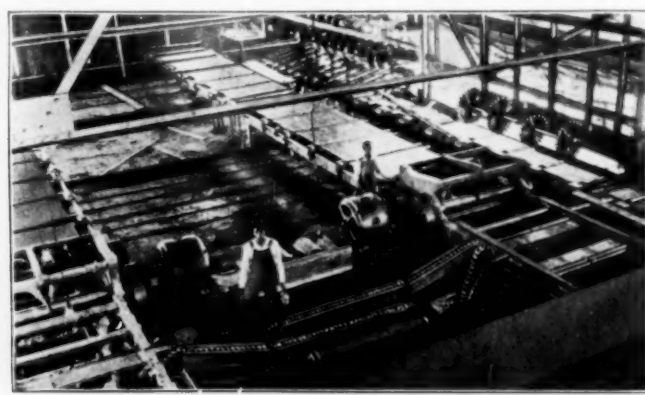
INTERIOR OF SAWMILL SHOWING TWO DIRECT-CONNECTED MOTOR-DRIVEN EDGERS
